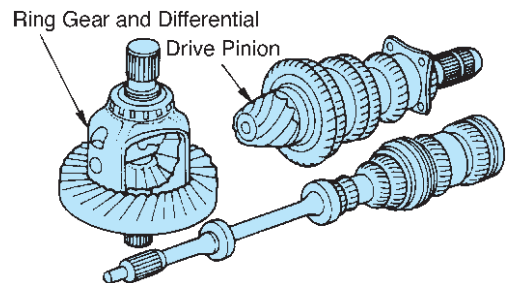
The gear sets from the transaxle illustrated in Figure 7-15 are shown here; the transmission section gear set and differential are very similar to those of other transaxles. (Courtesy of Subaru of America, Inc.)
